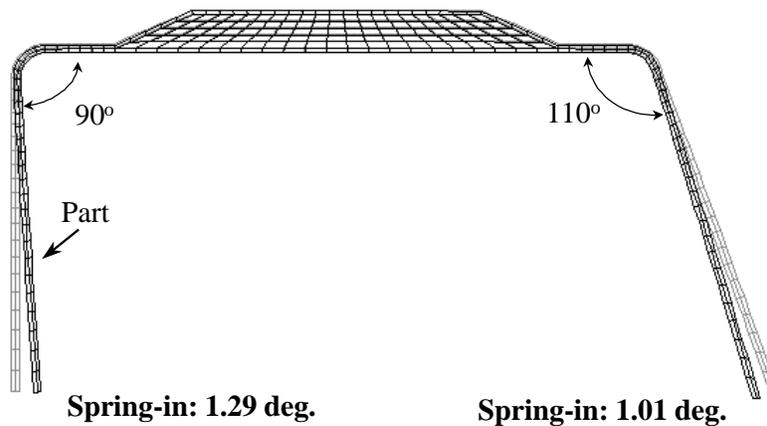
Final part shape and flange spring-in due to residual stress build-up during cure.
